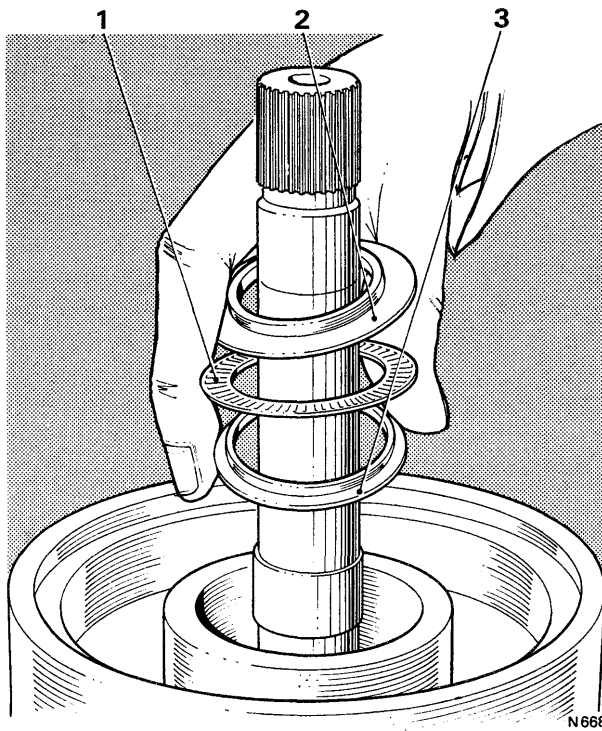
FITTING RACES AND THRUST BEARINGS TO SUN GEAR
